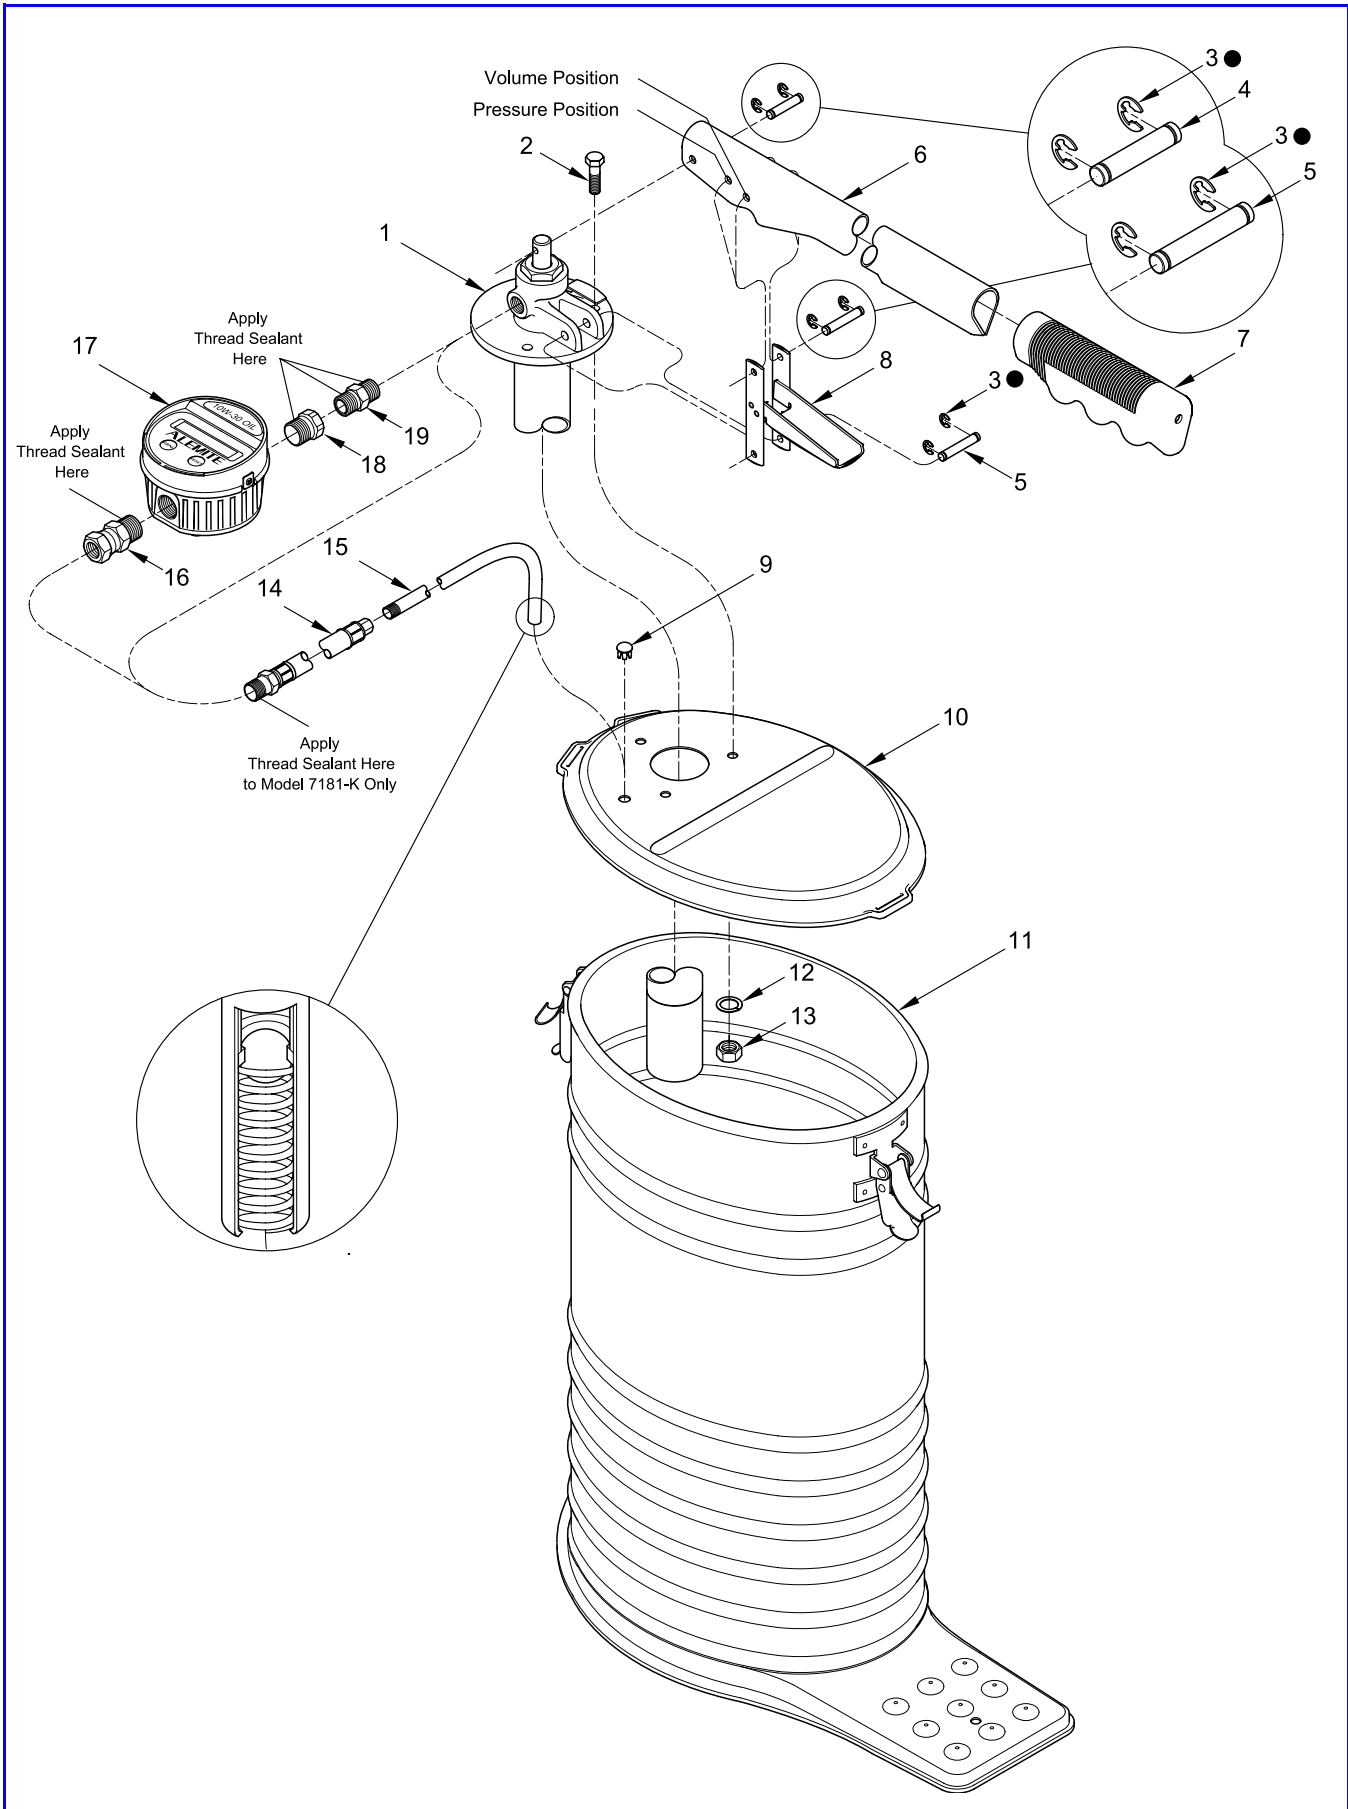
Portable Hand-Operated Pump Model 7181 Series - Exploded View
